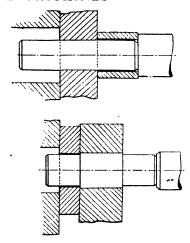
FORCING A WHEEL ON TO ITS SHAFT
